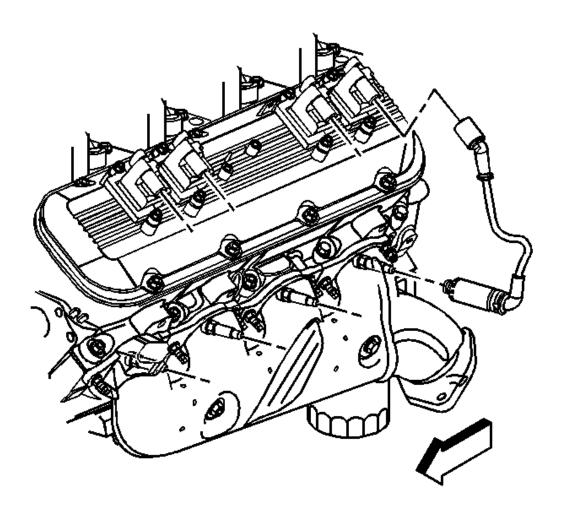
View Of Spark Plug Wires (Left) Courtesy of GENERAL MOTORS CORP.
